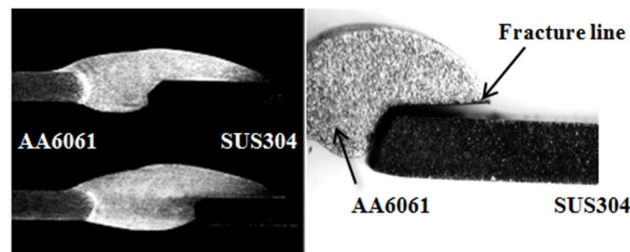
Cross sectional view of weld bead (a) as welded, and (b) after tensile testing.
